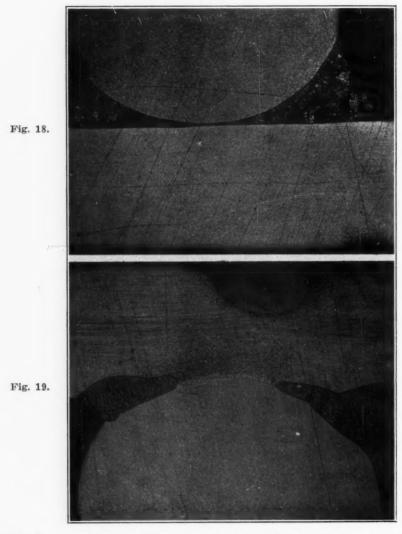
Finger spring soldered to arch wire with spot soldering machine, original magnification ×100. A good joint except for melting of wire by electrode.
